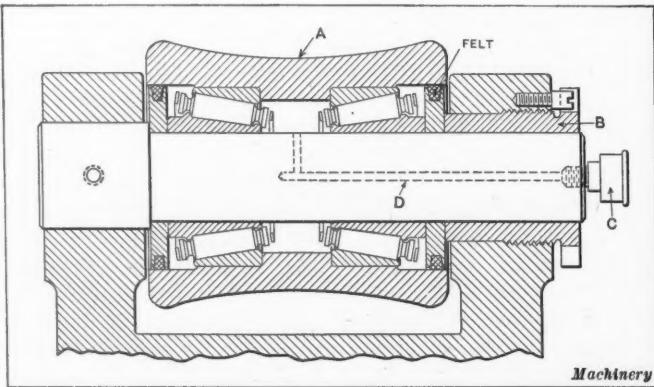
Roller Bearing Mounting for Rolls of Straightening Machine
